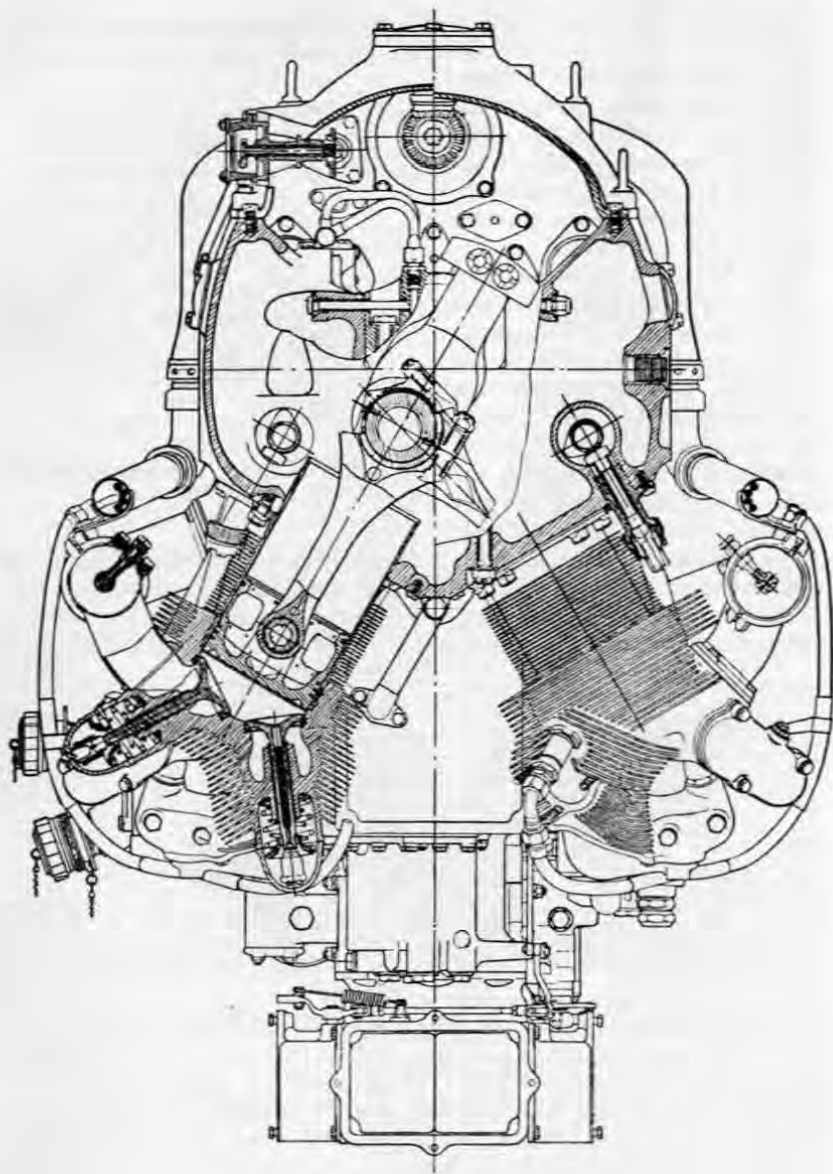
Sectional view of the Argus As 410 aircraft engine with a well finned cylinder head.
